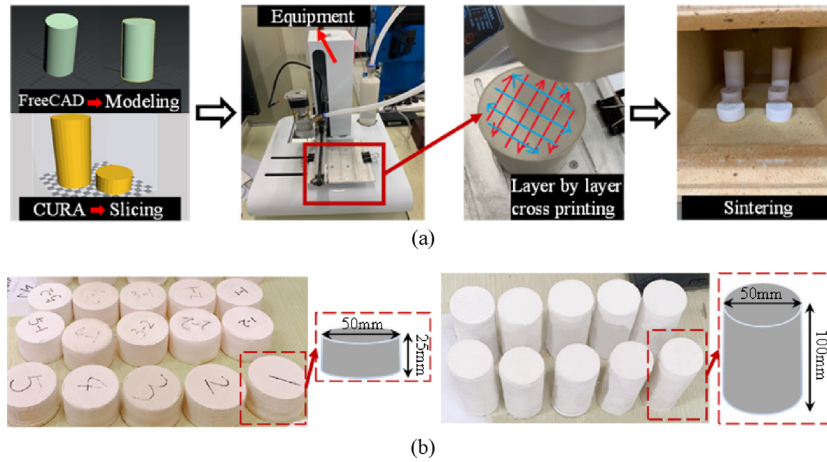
(a) Forming process of EFF 3D printing; and (b) EFF 3D printing disc and cylindrical specimens.
